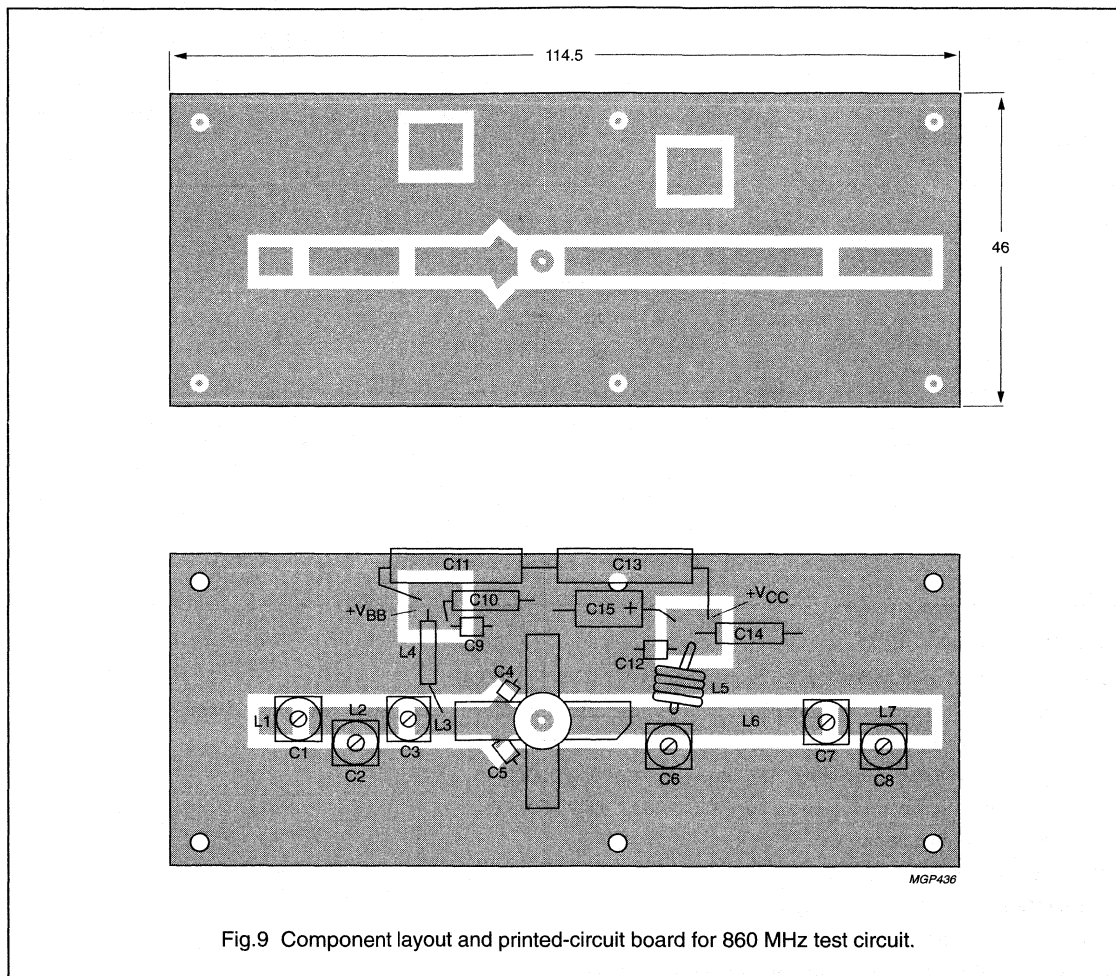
Component layout and printed-circuit board for 860 MHz test circuit.
